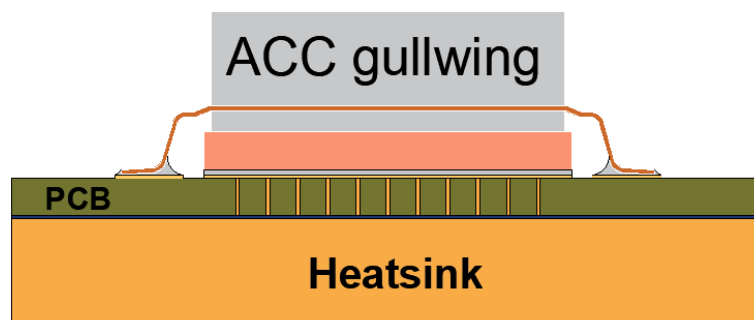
PCB with vias bonded to a heat sink, intended for gullwing low-power packages
